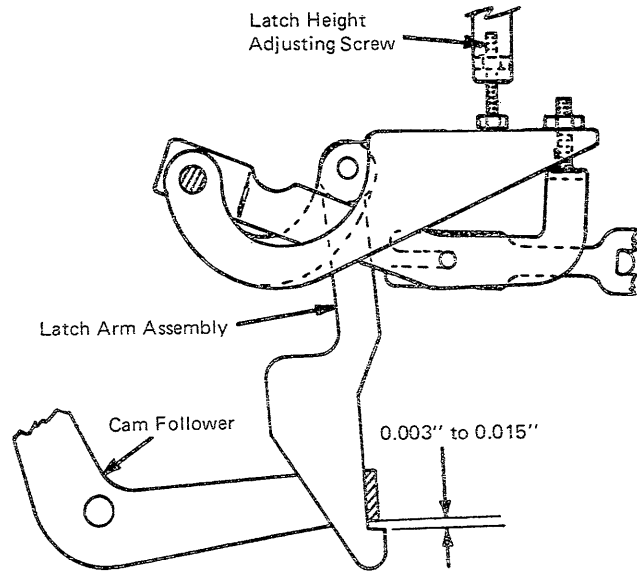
Carrier-Return Latch Height (Level 2), 11-Inch Machine
